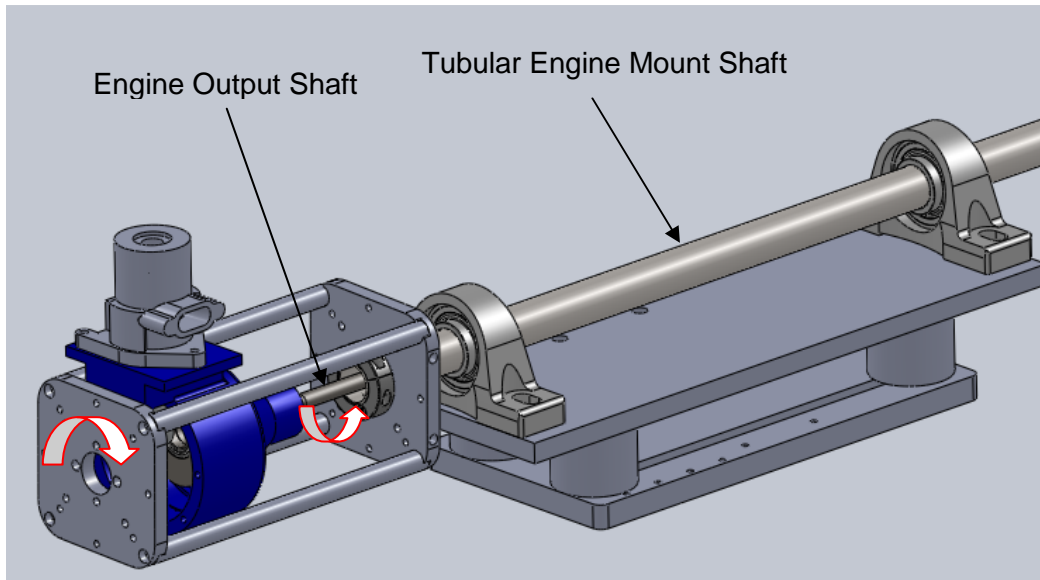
Engine Test Fixture and Reaction Torque Concept
